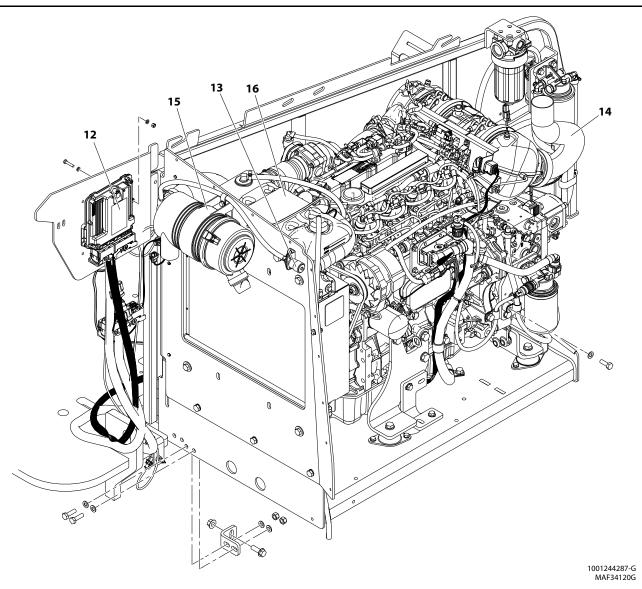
Deutz Engine D2.9L4 (Stage V) - Sheet 2 of 2
